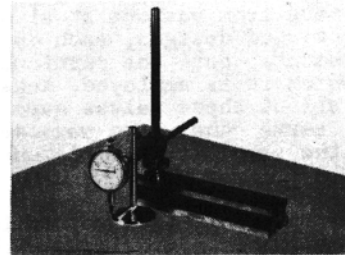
Method of Checking Valve Edge Thickness with Dial Indicator
